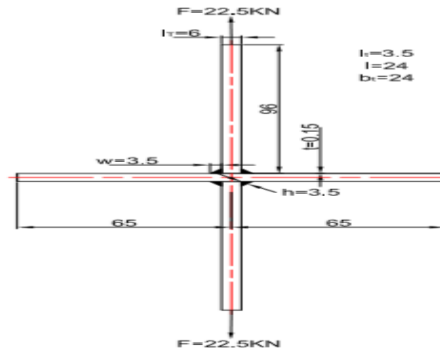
Flat weld size 3.5x3.5 of T-Joint with 0.15mm gap
